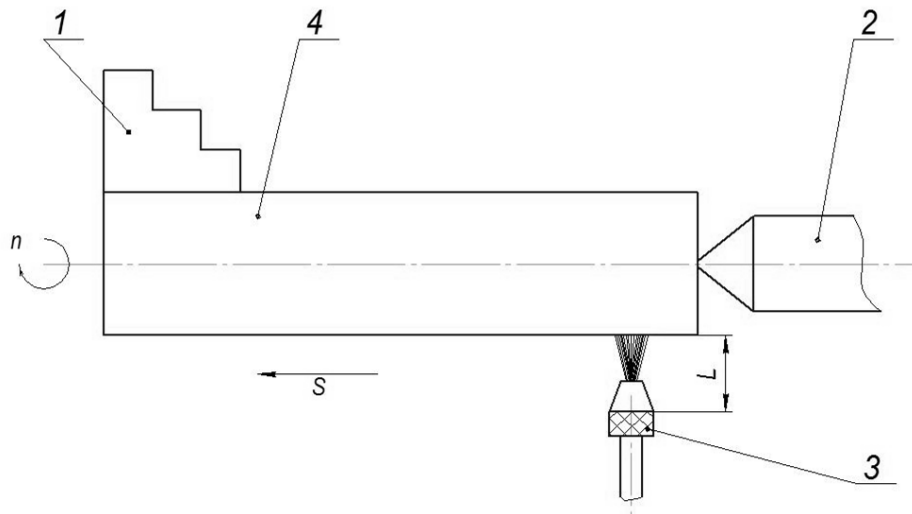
Spraying scheme: 1 - carriage 3 cam; 2 - the center of the rear headstock of the machine; 3 - combined sprayer; 4 - detail $d = 52.5$ mm; $L = 50$ mm - the distance from the nozzle to the part; $n = 315$ rpm - speed;
